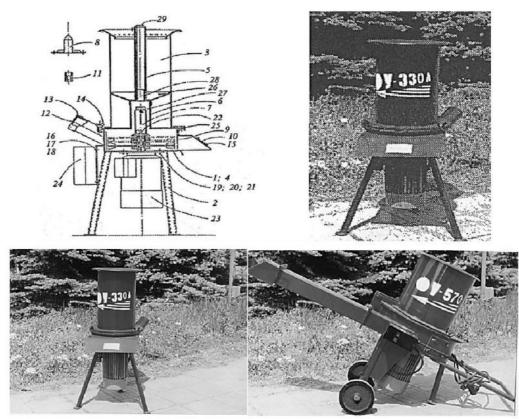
Overview of the designed constructions FU-330 A and FU-570 with combined working component:
